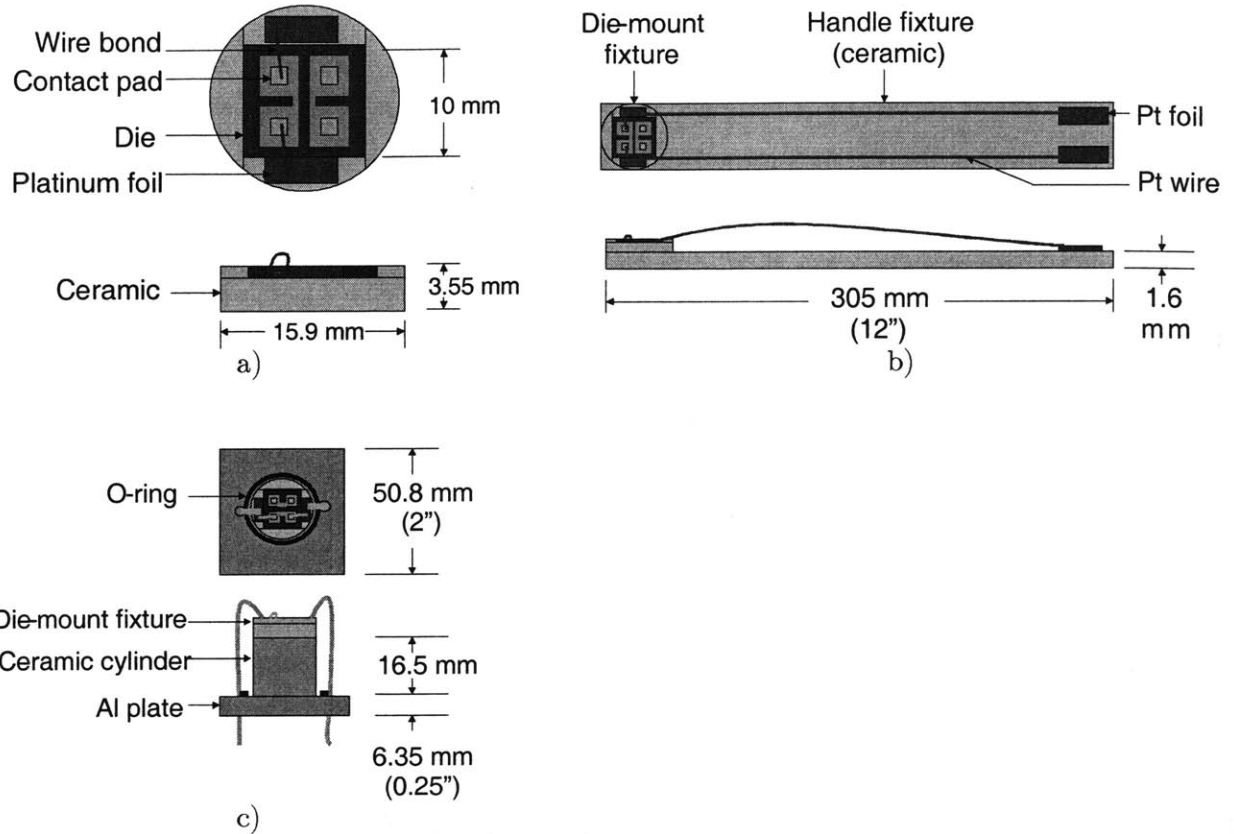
Fixture designs. Not to scale. a) The ceramic fixture used to mount the die. The die and two pieces of platinum foil are epoxied to the ceramic fixture. b) The ceramic handle fixture used for the furnace. The die-mount fixture and two pieces of platinum foil are epoxied to opposite ends. c) The shock tube instrumentation port fixture. The die-mount fixture is epoxied to the shock tube instrumentation port fixture and wires are soldered to the platinum foils on the die-mount fixture.
